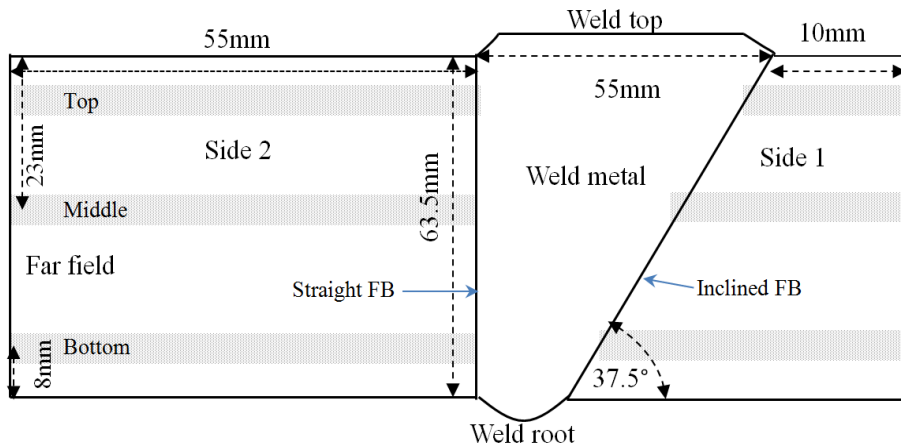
Geometry of multi-pass weld of Type 316 stainless steel (EBSD measurement zones shaded)
